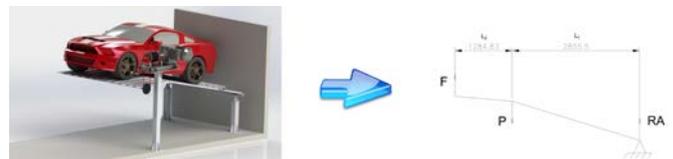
Duplicator and free body diagram showing how the mechanical components were dimensioned (dimensions in mm)
